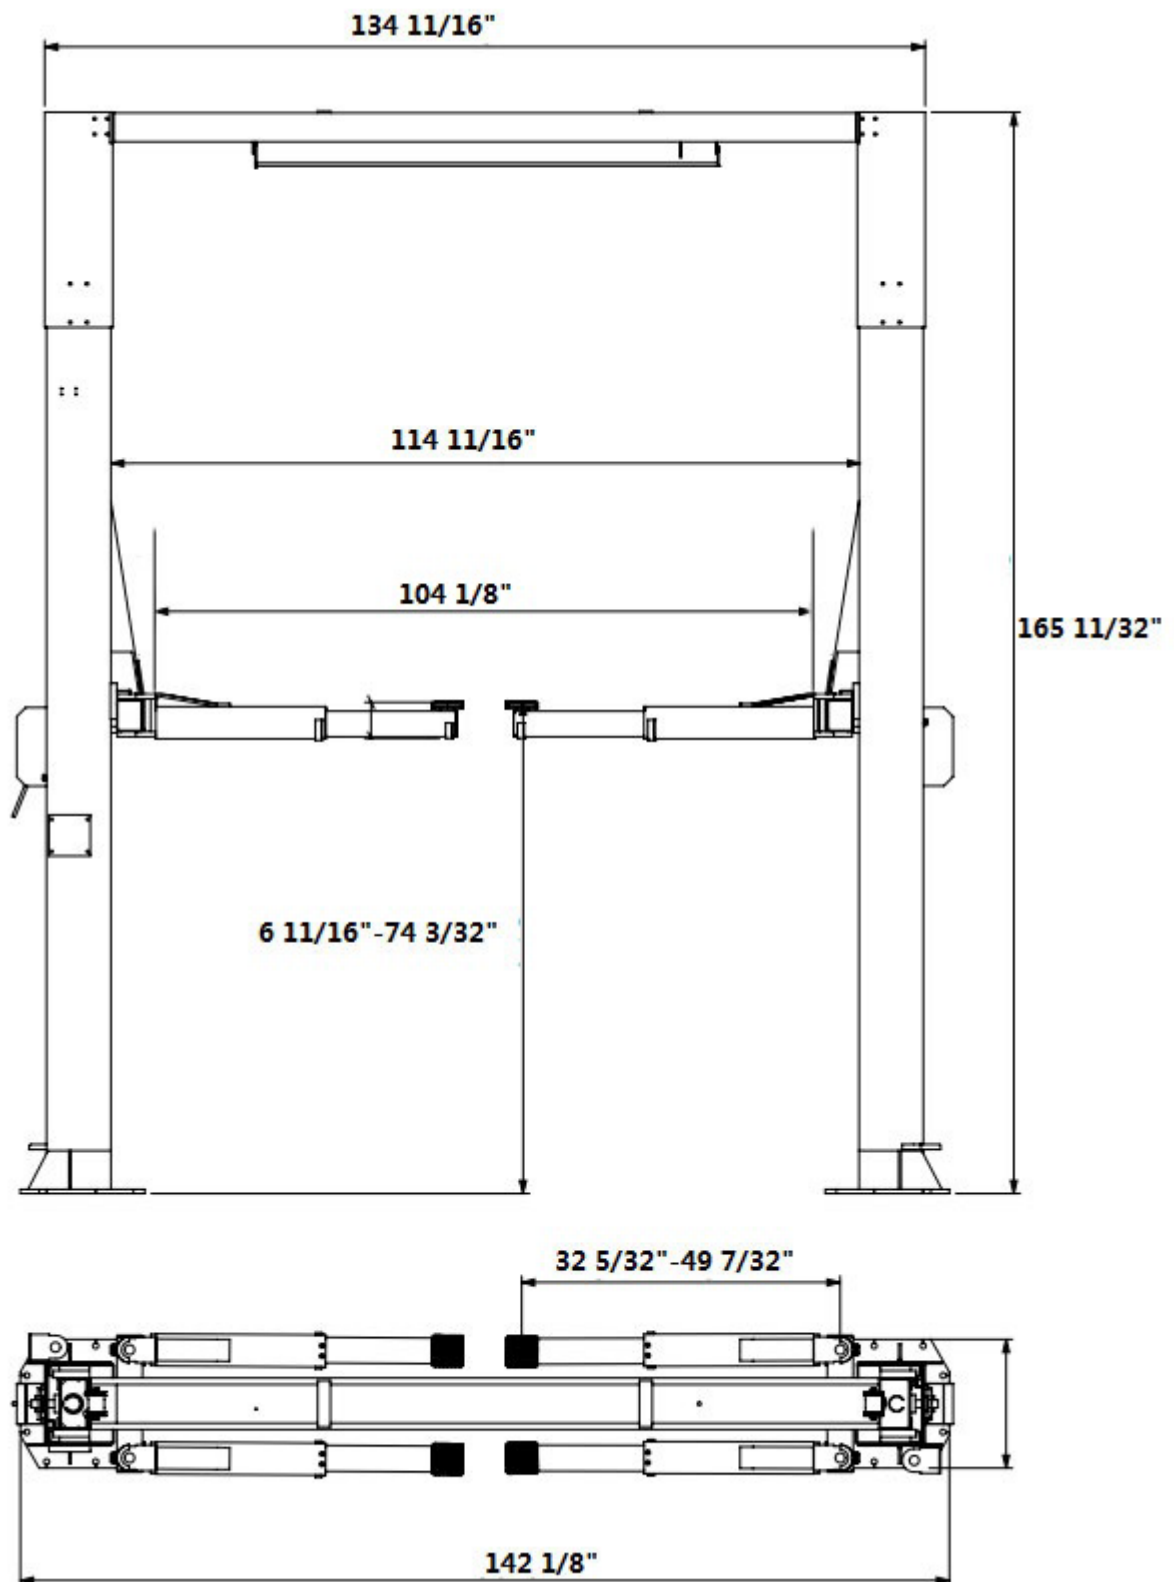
Dimensions and overall clearances 14000LBS/AP-14SR
